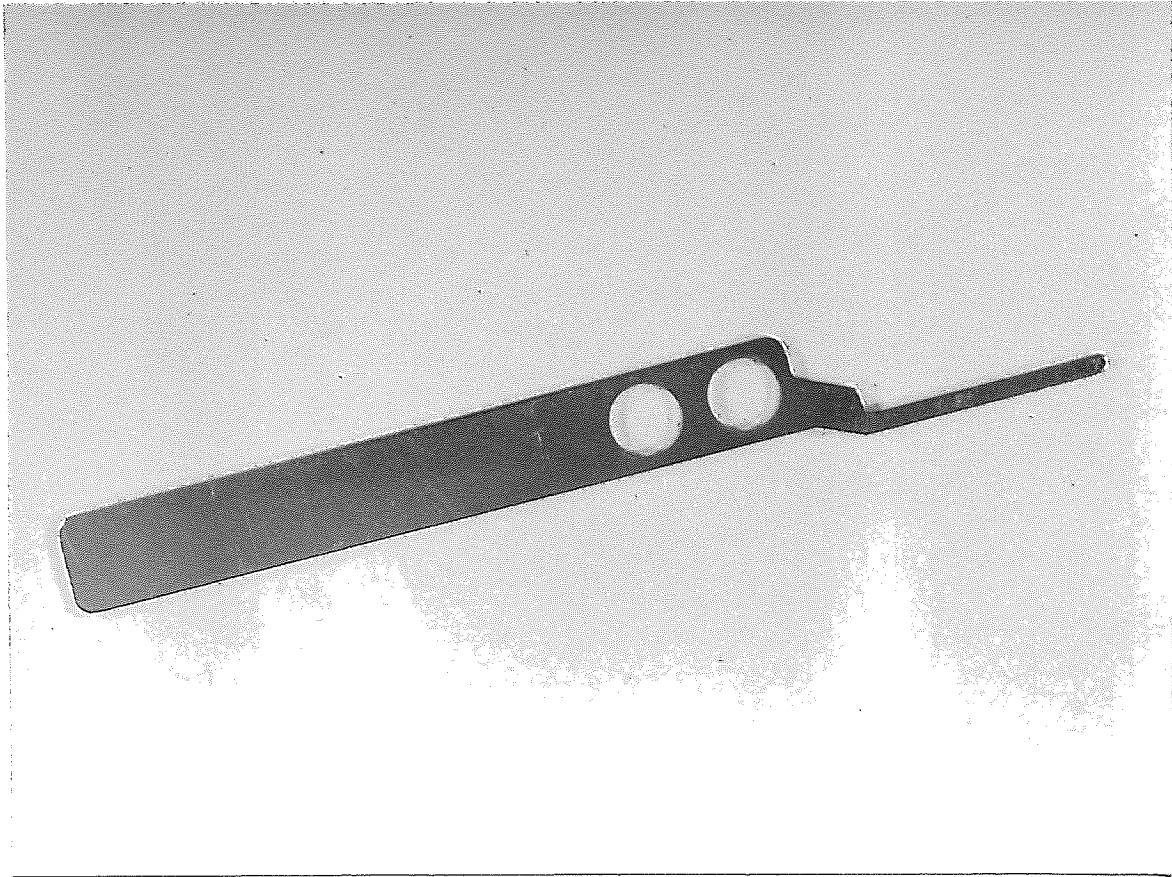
1.7X, Nickel silver contact spring manufactured at Western Electric, Kearny Works.
